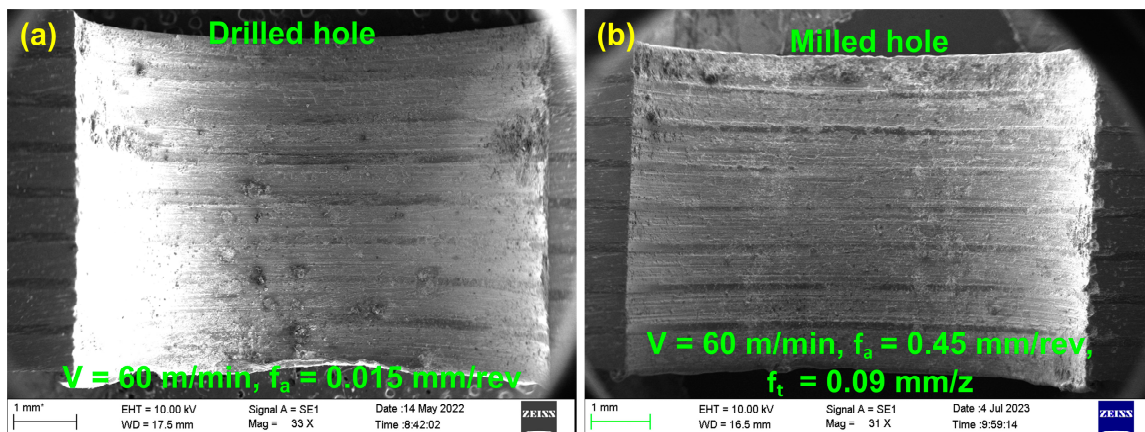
Holes with good surface finish were observed during (a) drilling and (b) helical milling.
